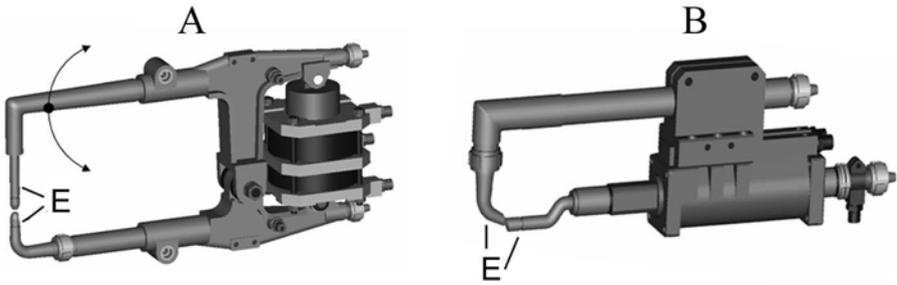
A: X type spot welding gun; B: C type; E: electrodes.
